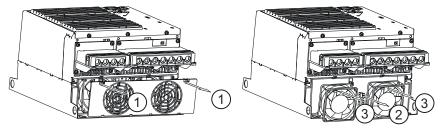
Cooling fan removal FSD and FSE (15 kW ... 37 kW)
